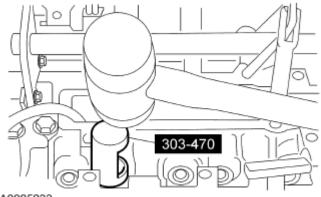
Removing Valve Seal Using Valve Stem Oil Seal Remover And Slide Hammer Courtesy of FORD MOTOR CO.
